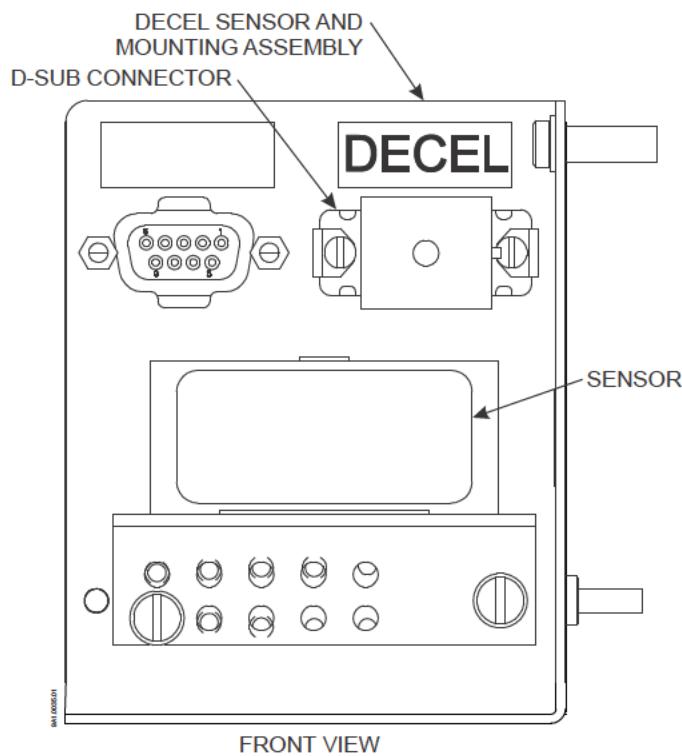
Decelerometer Sensor and Mounting Assembly
